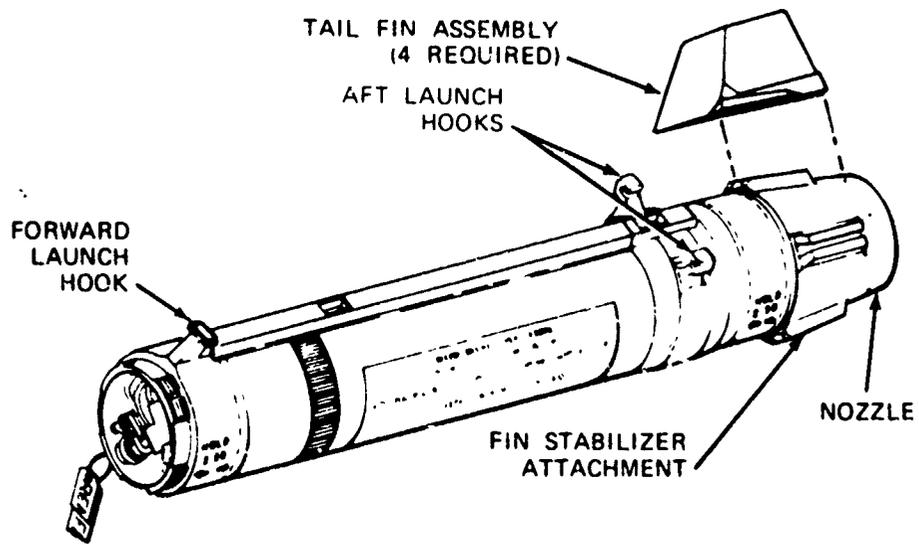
Rocket Motor Section Mk 53 Mod 1 and Mk 78 Mod 0 With Tail Fin Assembly
